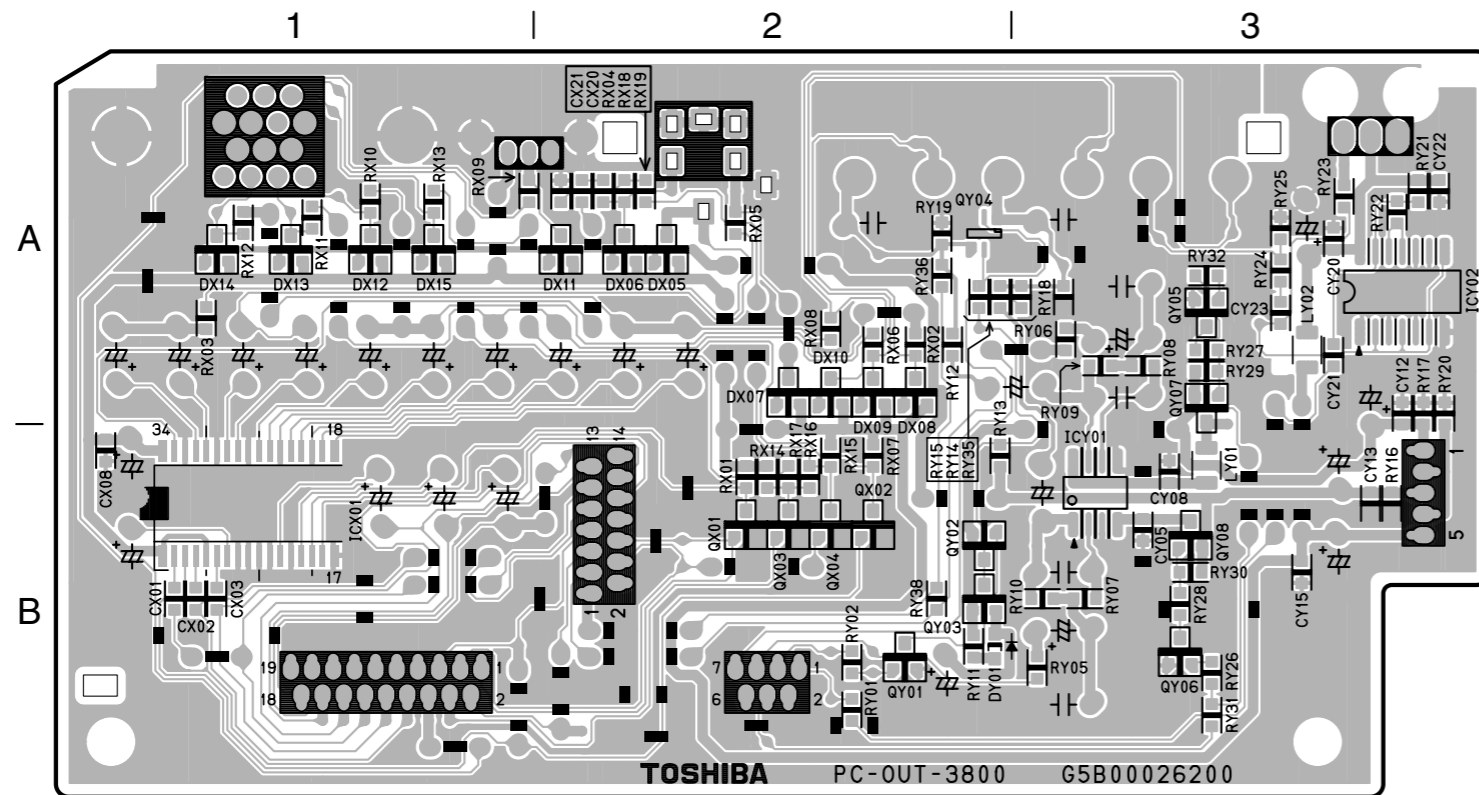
B EU05 Output PC Board (Bottom side)
